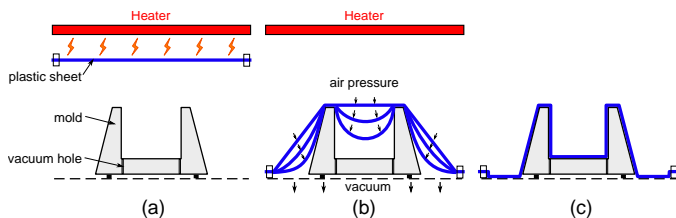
A typical process of vacuum forming. (a) A plastic sheet is heated until soft enough for forming. (b) Then it is loaded to the mold; upon touching the mold, it begins to deform. As the air in the space below is vacuumed, the atmospheric air pressure forces the plastic sheet to conform to the mold surface. (c) After cooling down, the plastic is hardened into the new shape.
